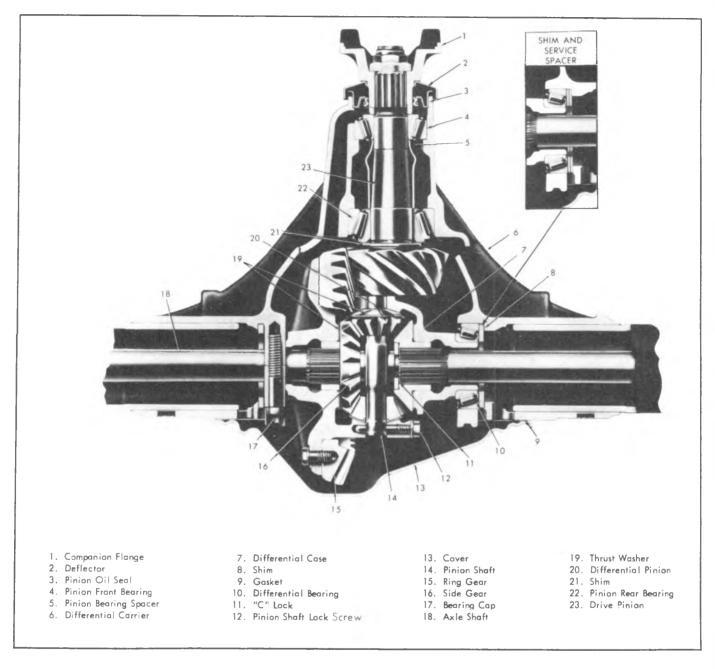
B-4--8-1/2" and 8-7/8" Ring Gear Axle Cross-Section Typical
